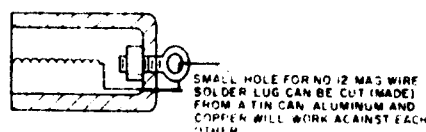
The coil will expand to make a nice fit inside the PVC tube. The aluminum fits snugly over the PVC, and the cap rims help hold the aluminum tube in place. It all makes a very nice looking assembly.
